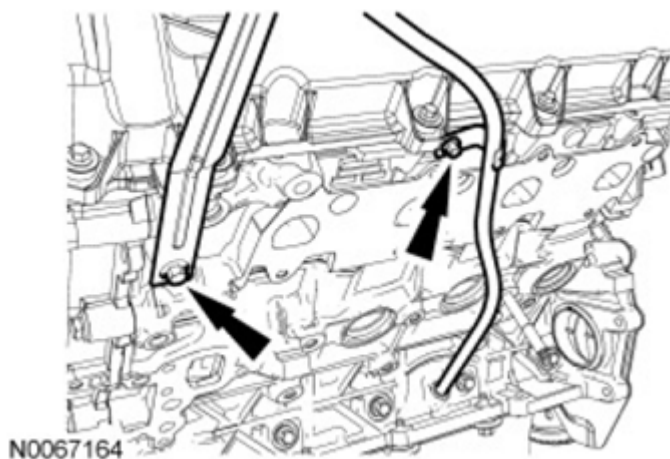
Locating Oil Level Indicator Tube And Bolts
